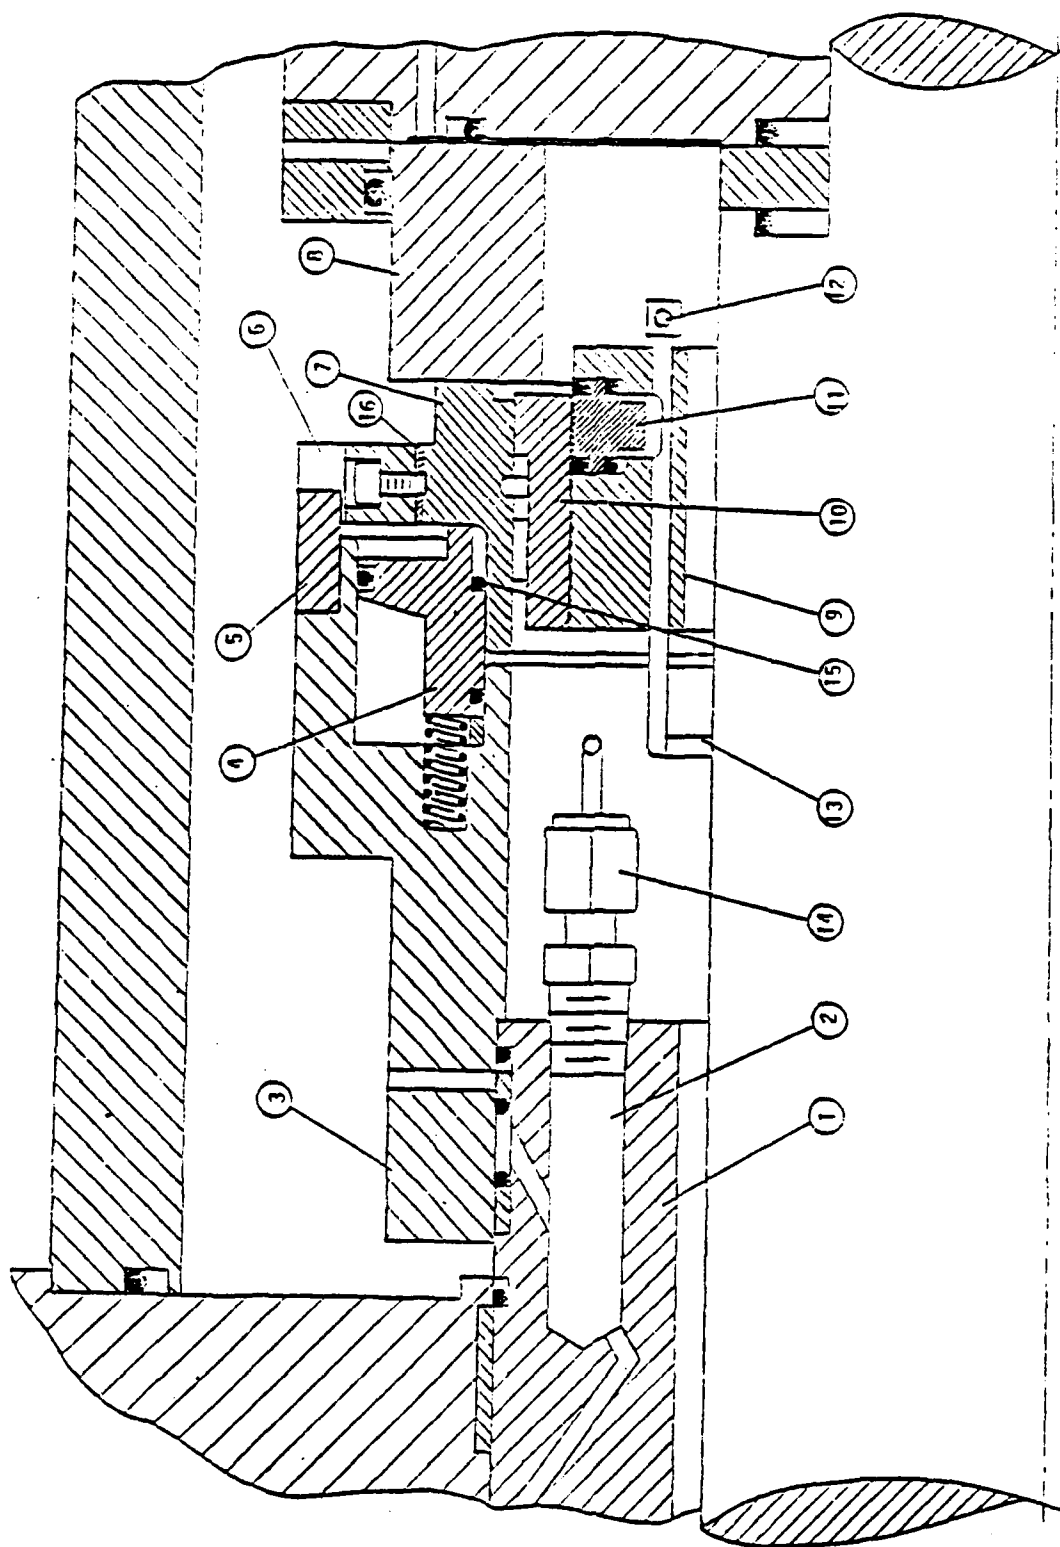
Nine-wave Seal Assembly View, Second Design.
